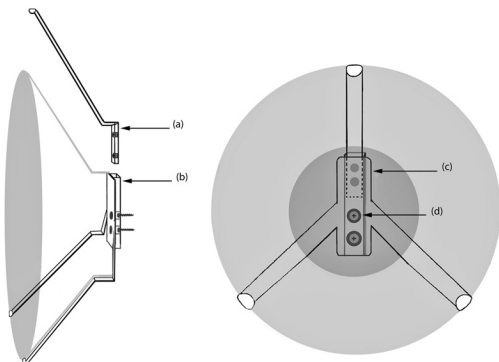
Front and side views of plate mount with a magnetic telescoping mount arm: (a) telescoping mount arm with rare earth magnets set into place, (b) steel channel assembly that receives the telescoping mount arm and screw to the case wall, (c) rectangular bar that the steel channel is welded to, and (d) two button head wood screws.
